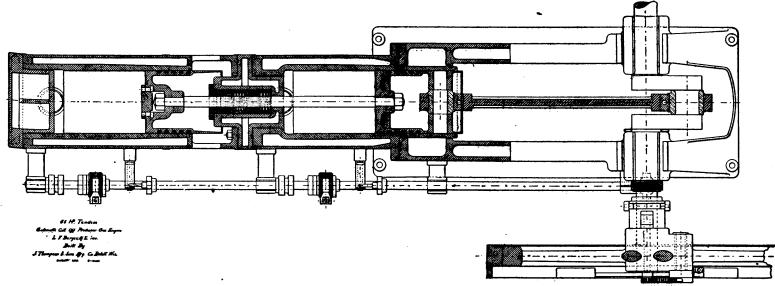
CROSS SECTION OF 55 H.P. TANDEM AUTOMATIC CUT-OFF SHOWING CYLINDER ARRANGEMENT AND PISTON ROD PACKINGS.
